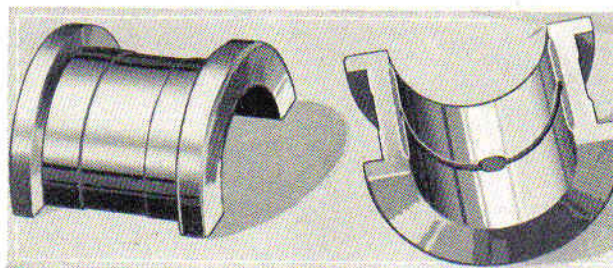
Front Bearing for Headstock Spindle. Rear Bearing is similar to Front Bearing, but smaller in size and is not shown here because of lack of space.
